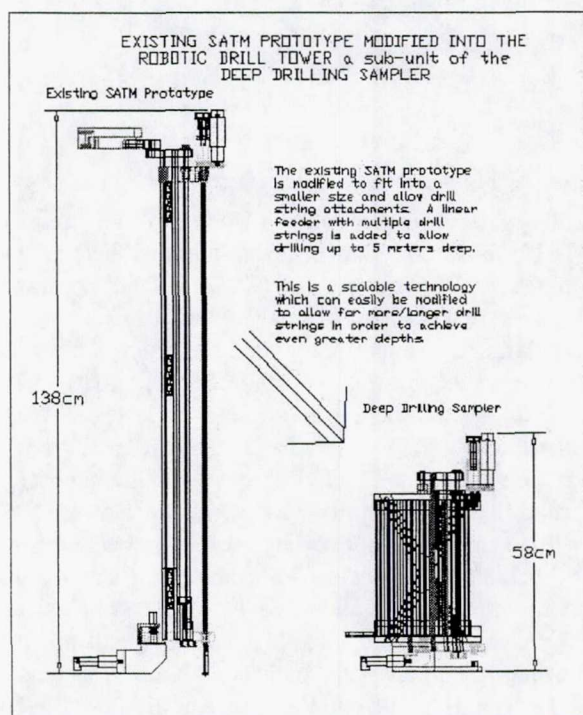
A copy of the existing Champollion/ST4 SATM prototype will be modified into a Robotic Drill Tower capable of accepting drill string segments.
